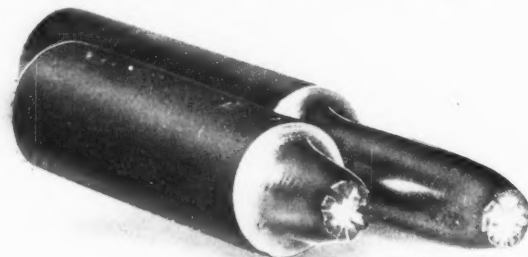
Test Bar, 1-2 inch Diameter, Vanadium Crank-shaft Steel. Star Fracture.
